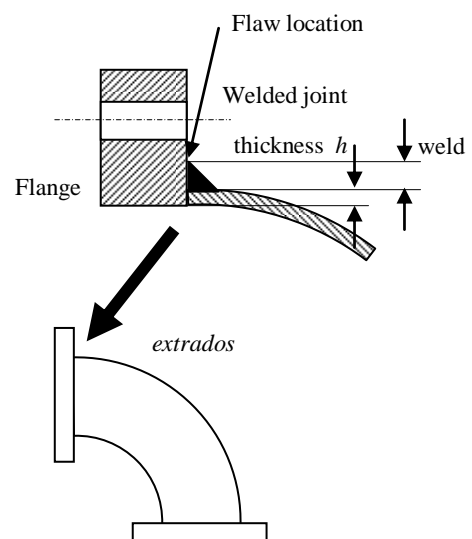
Part-through crack in a welded flange joint of a curved pipe
